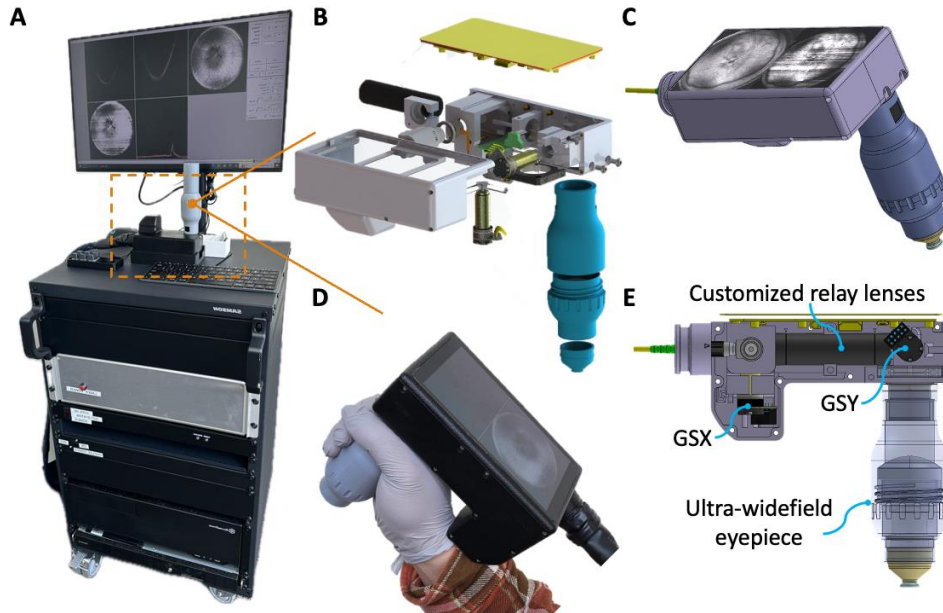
Integrated system and portable probe assembly. (A) Photograph showcasing the assembly panretinal handheld OCTA system. (B) Exploded view detailing the mechanical design of the probe. (C) 3D mechanical designs of the fully assembled portable probe. (D) Photographic depiction of the fully assembled portable probe. (E) Front view of the 3D mechanical design, showing key internal components of the probe.
